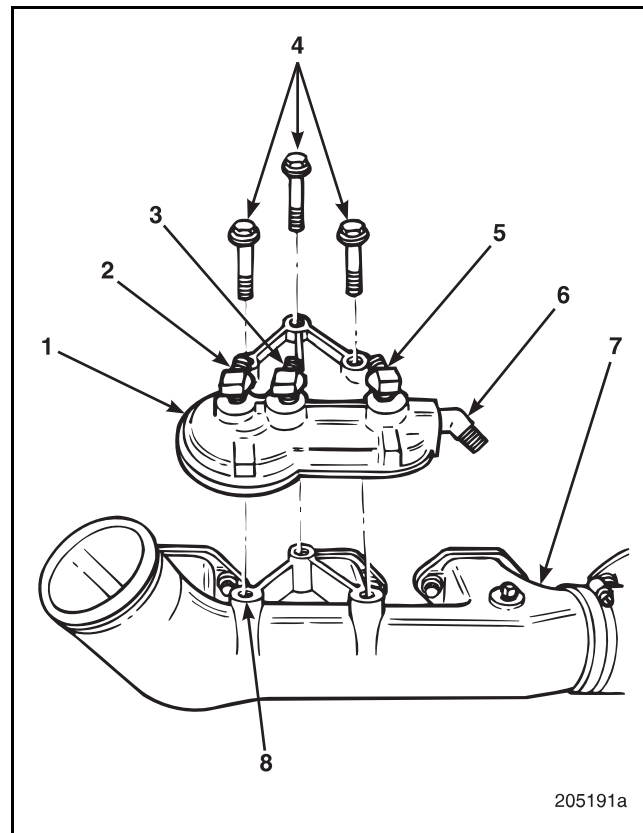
Fuel Filter Adapter Assembly Installation
